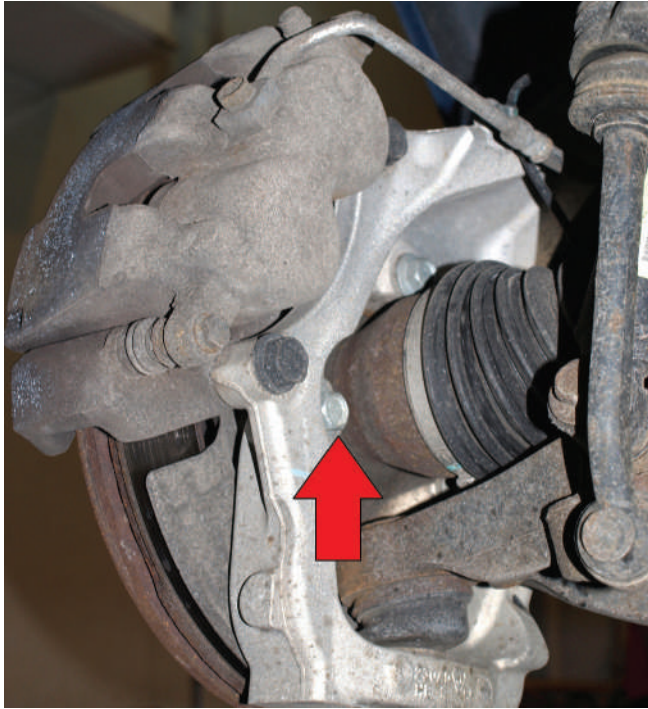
The bolts holding the wheel bearing to the knuckle.
